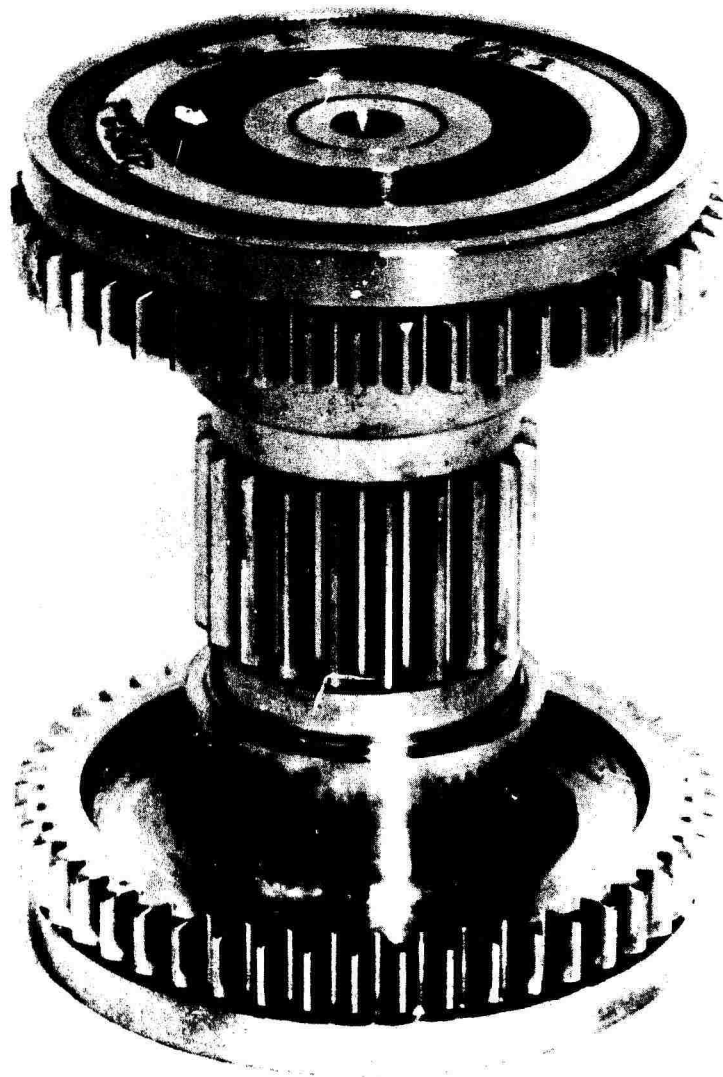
FIRST ROW ROLLER GEAR, X1Y1
